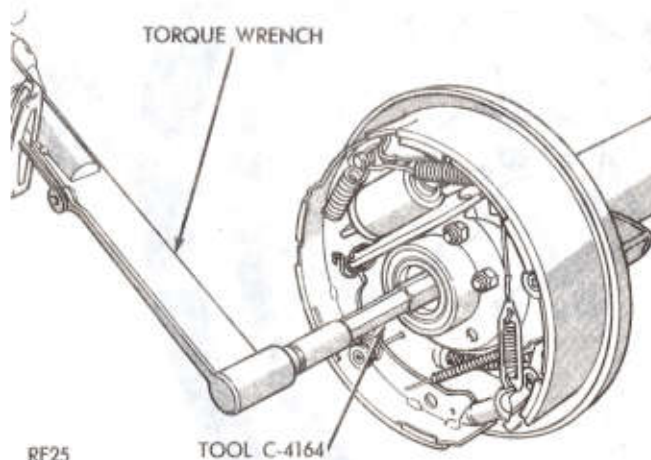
Tool C-4164 Positioned to Loosen or Tighten Hex Adjuster
